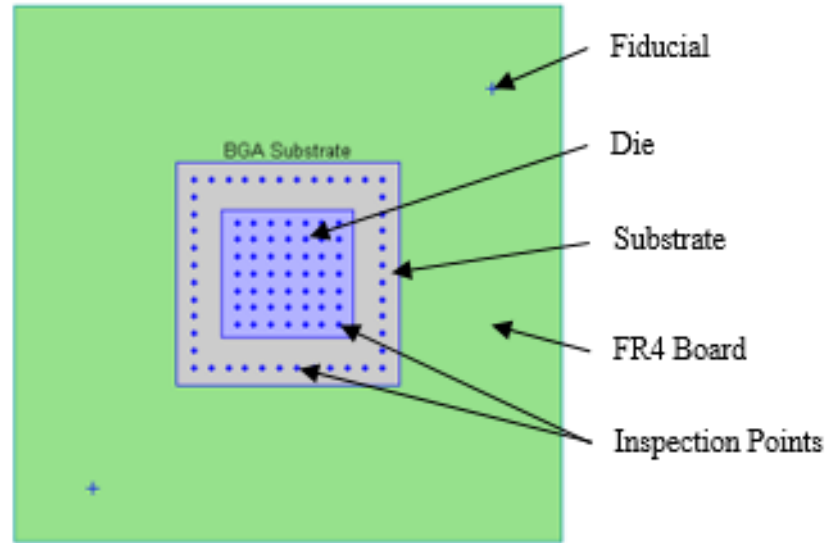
MATLAB image showing the top view of the package with depicted inspection pattern on the top surface
